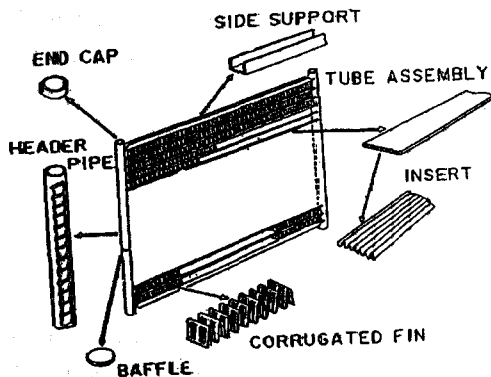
Illustration of brazed aluminum, parallel flow condenser.
